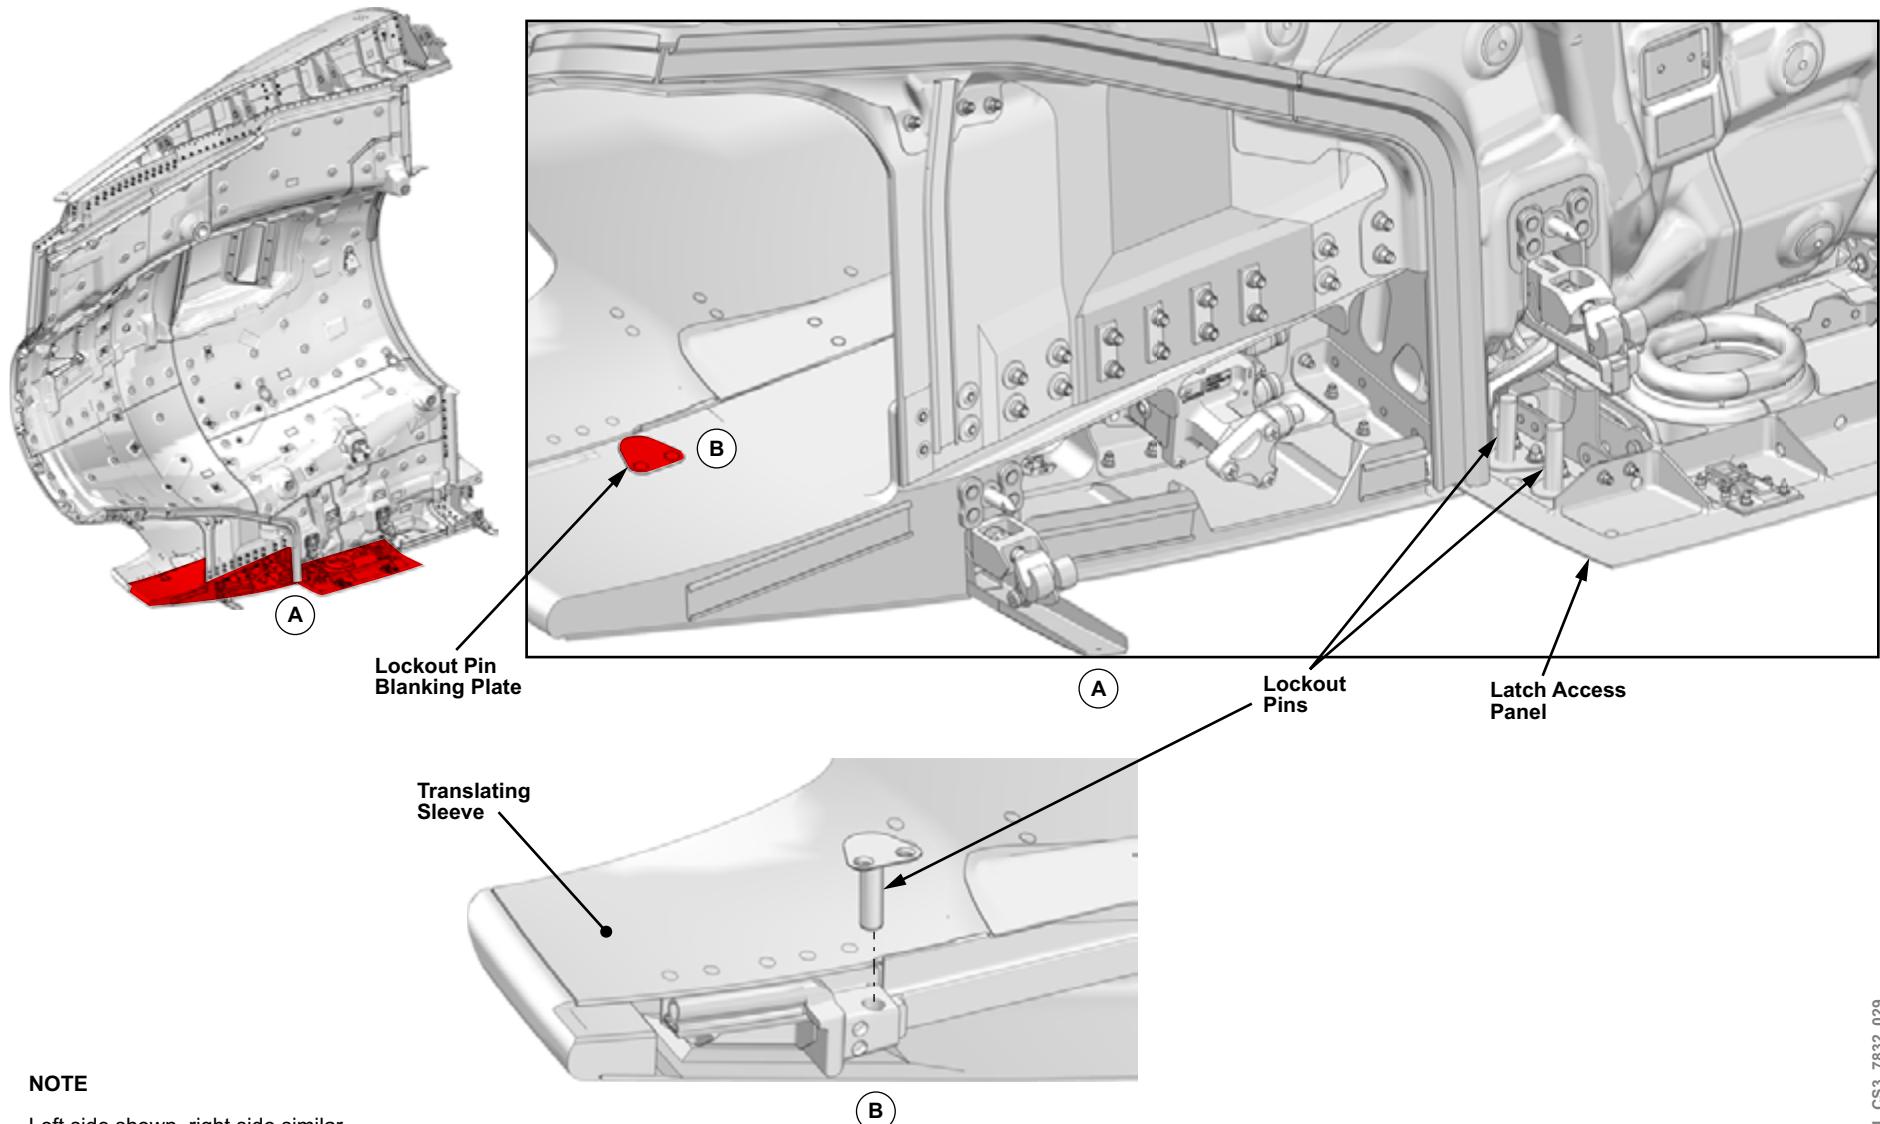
Thrust Reverser Latch Beam Lockout Pins
